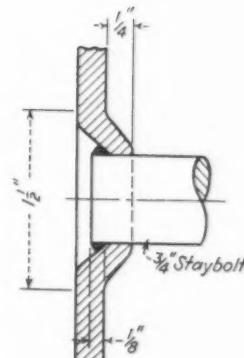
Detail of staybolt weld in the inside back sheet. The staybolt does not project beyond the inner surface of the sheet.
